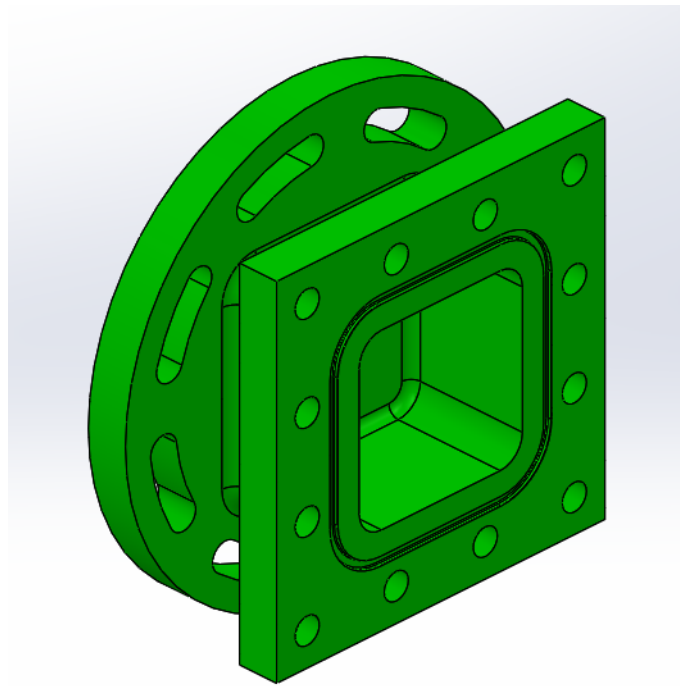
CAD render of the RRES blade root bending moment sensor housing.
